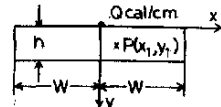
Specimen for analysis on welding deformations in bead-on-plate test
